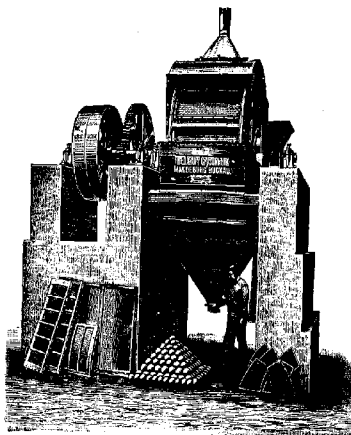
Ball Mill on Masonry Foundation—the Trituration Plates exposed.
